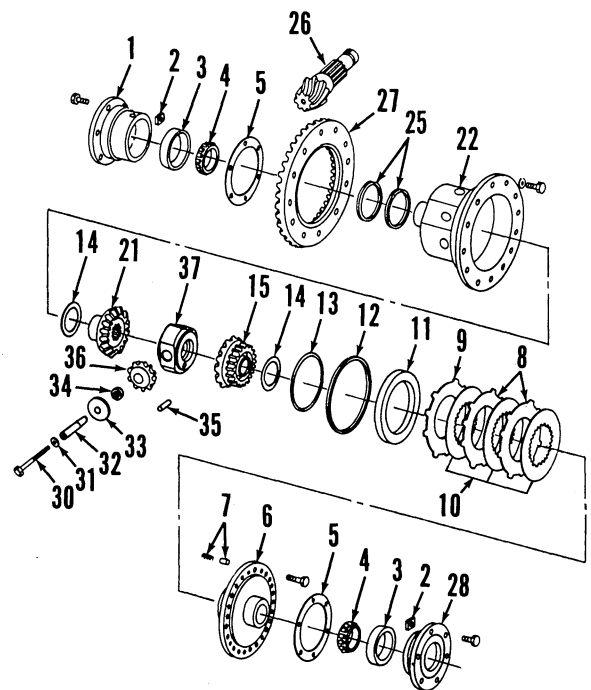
A—Exploded view of differential assembly used on late 4050 models and on all 4250, 4450, 4650 and 4850 models with Power Shift transmission. Differential used on these models equipped with Quad-Range transmission is similar except components are switched end-for-end to position bevel ring gear (27) on opposite side of differential drive shaft (26). Refer to Fig. 186 for legend except for the following:
